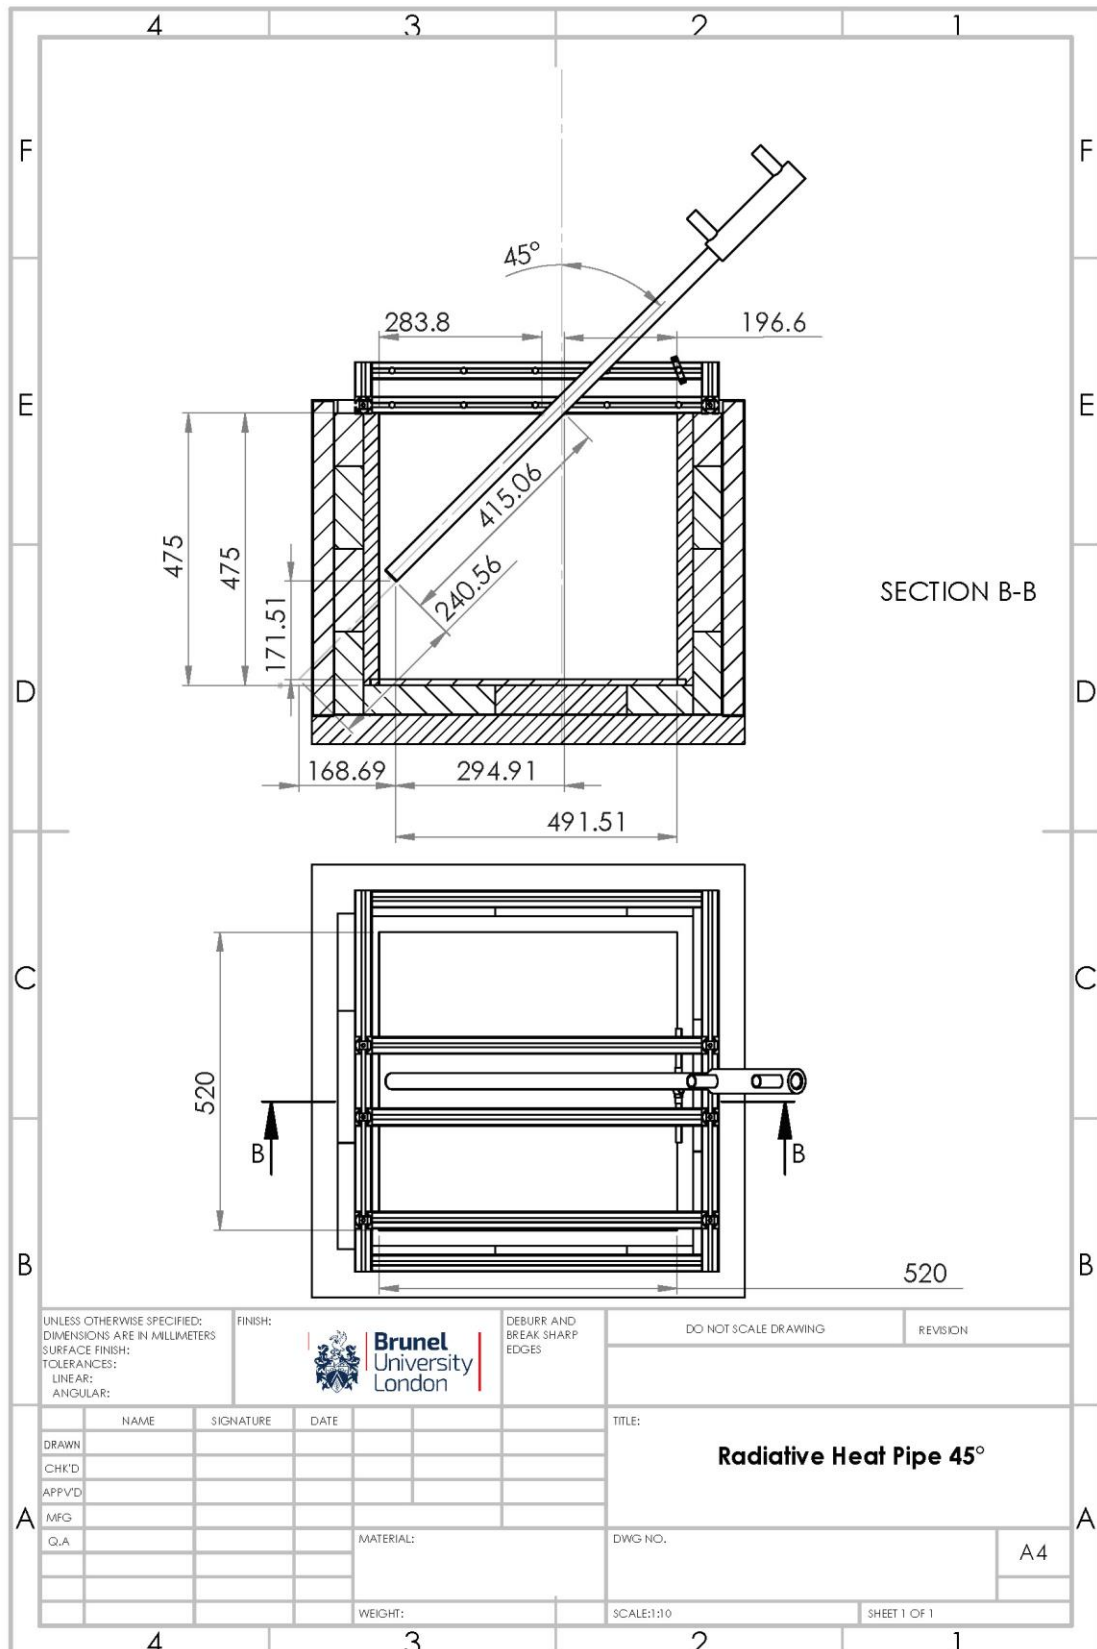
Two-dimensional drawings of the single heat pipe at 45° inclination test
